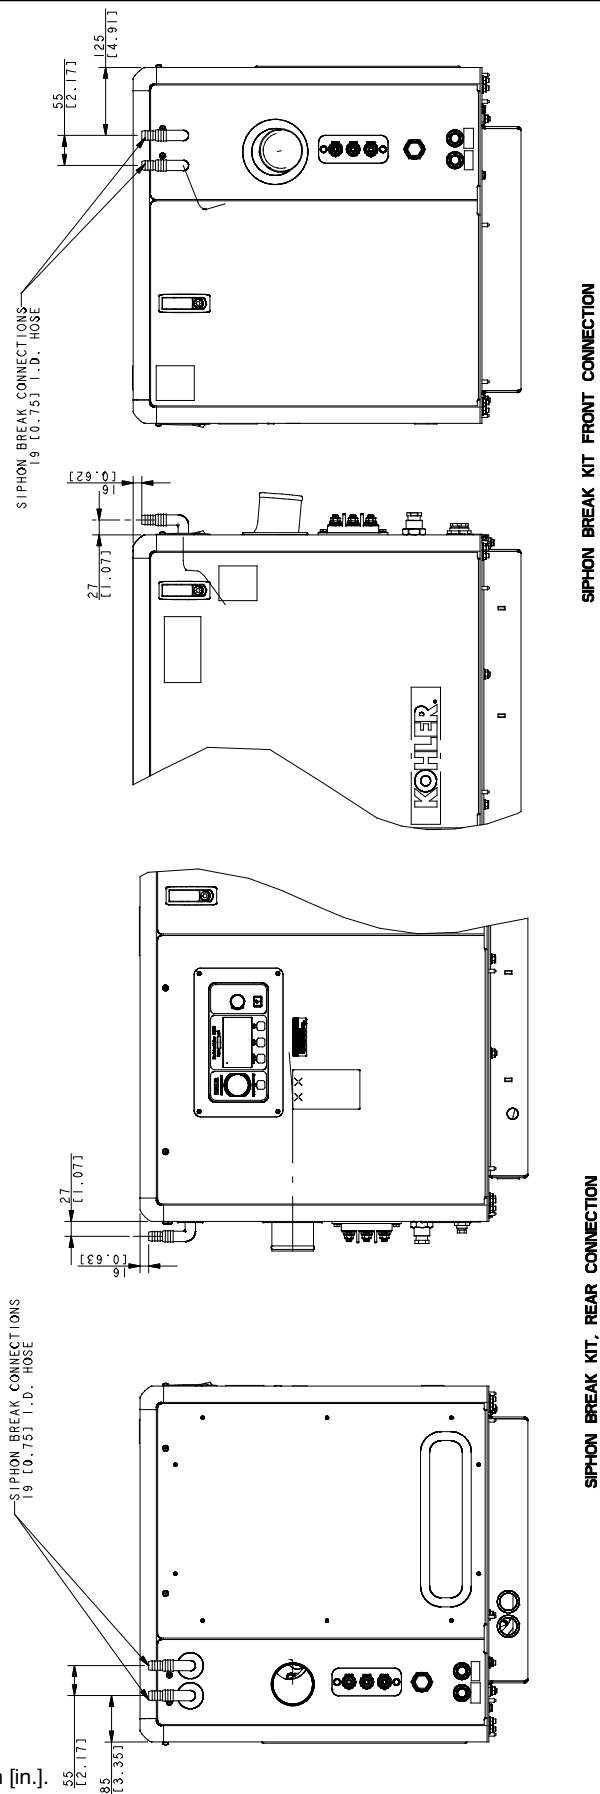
Dimension Drawing—Accessories, 14- 24EKOZD and 12- 20.5EFKOZD (Sheet 1 of 2)
